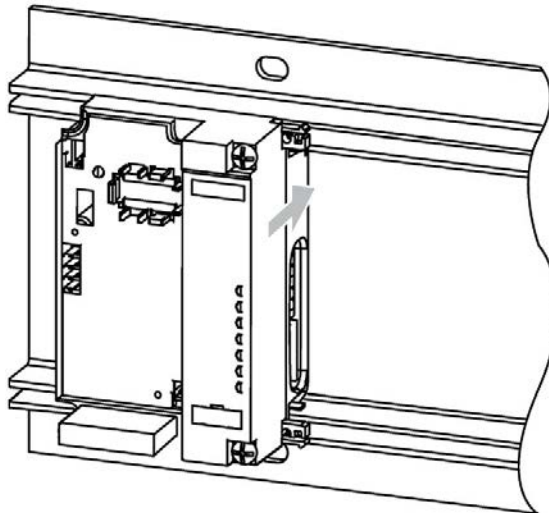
Mounting the interface module for PROFIBUS DP (example)
